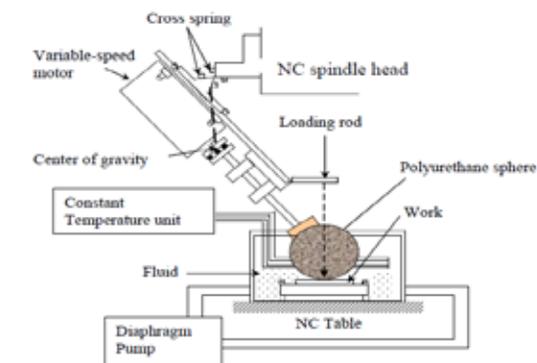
A schematic diagram of set-up for rotating sphere and workpiece interface in Elastic Emission Machining
